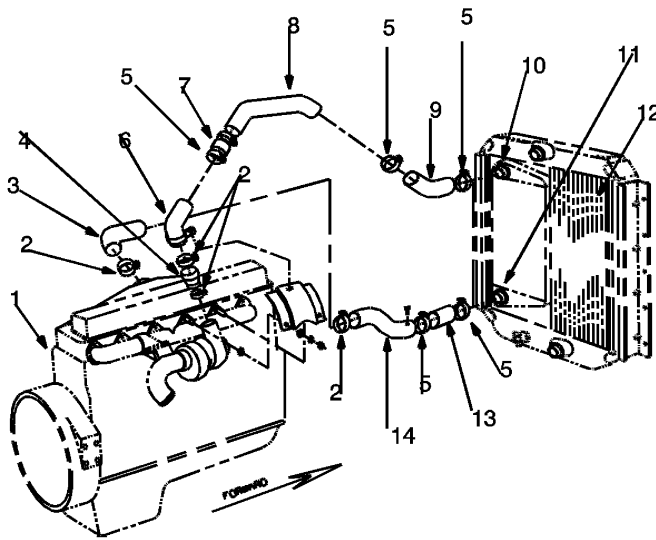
Charge Air Cooling System Mounted in Frame With Radiator, 3600/3800, 4700/4800 (Without PTO)
